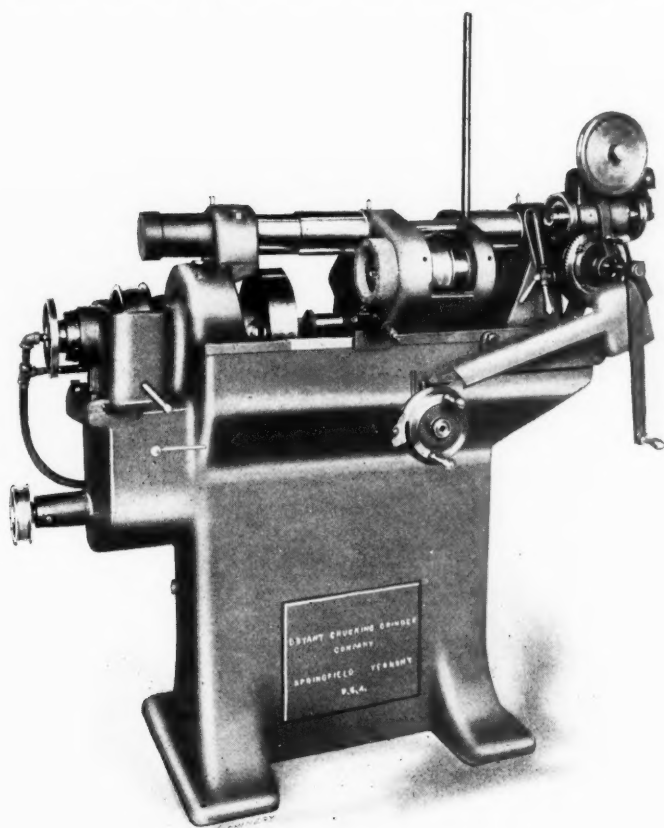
Two-spindle Face- and Hole-grinder built by Bryant Chucking Grinder Co.
